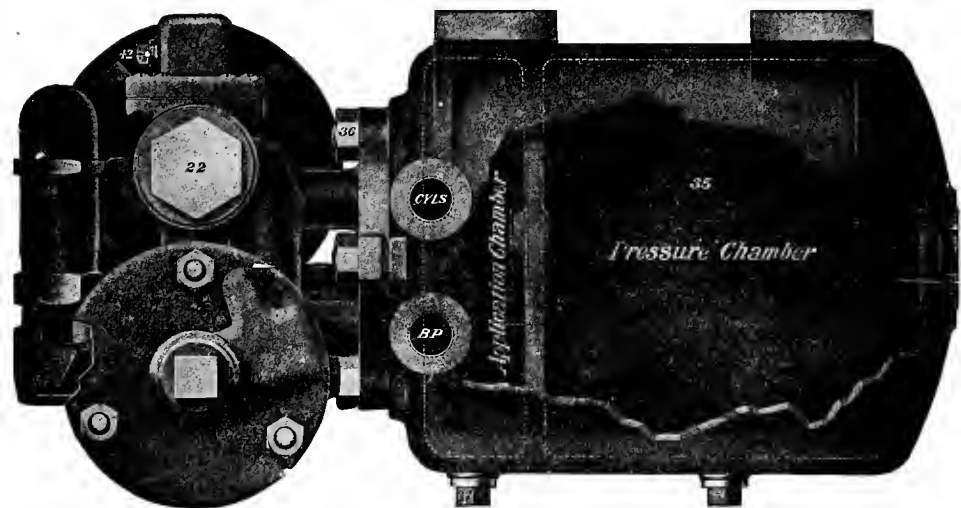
THE DISTRIBUTING VALVE AND DOUBLE CHAMBER RESERVOIR.
